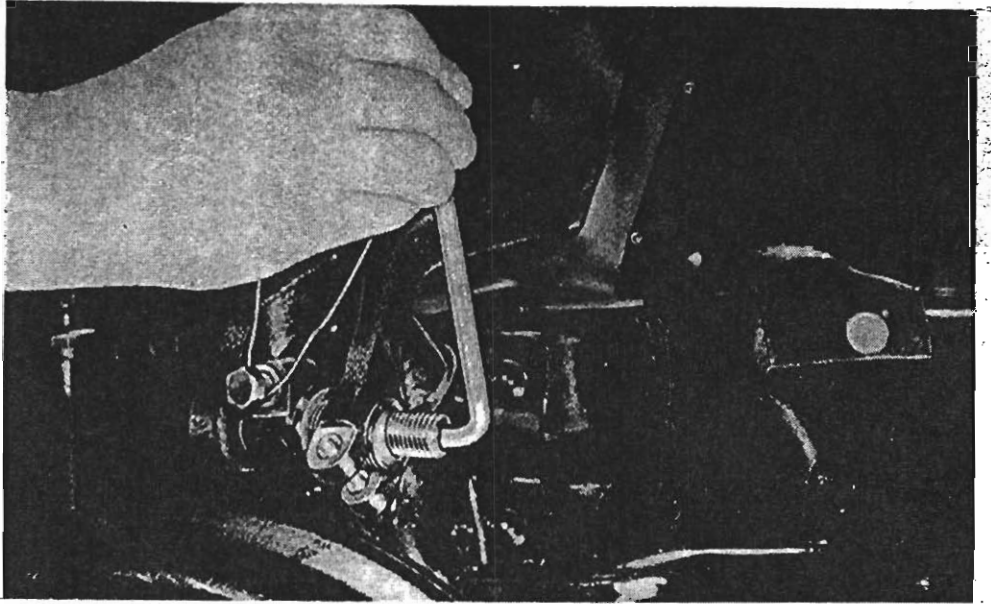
Screw Out the Upper Pivot Pin Using the Caster and Camber Adjusting Wrench KMO-487.
